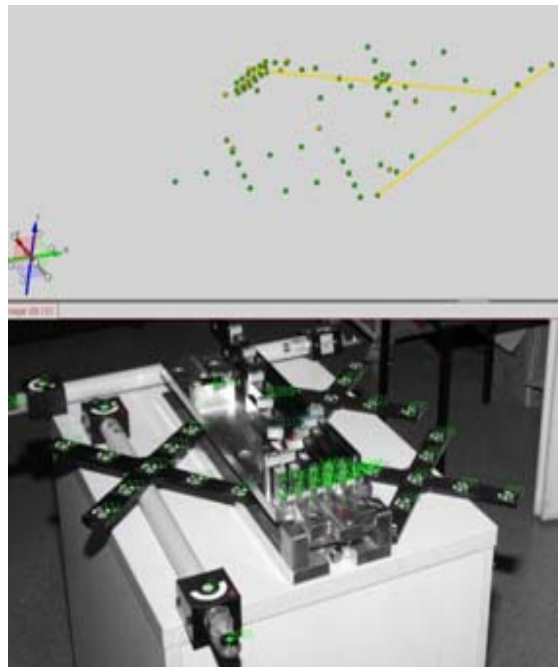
Test stand – gauge blocks marked with coded and uncoded points
